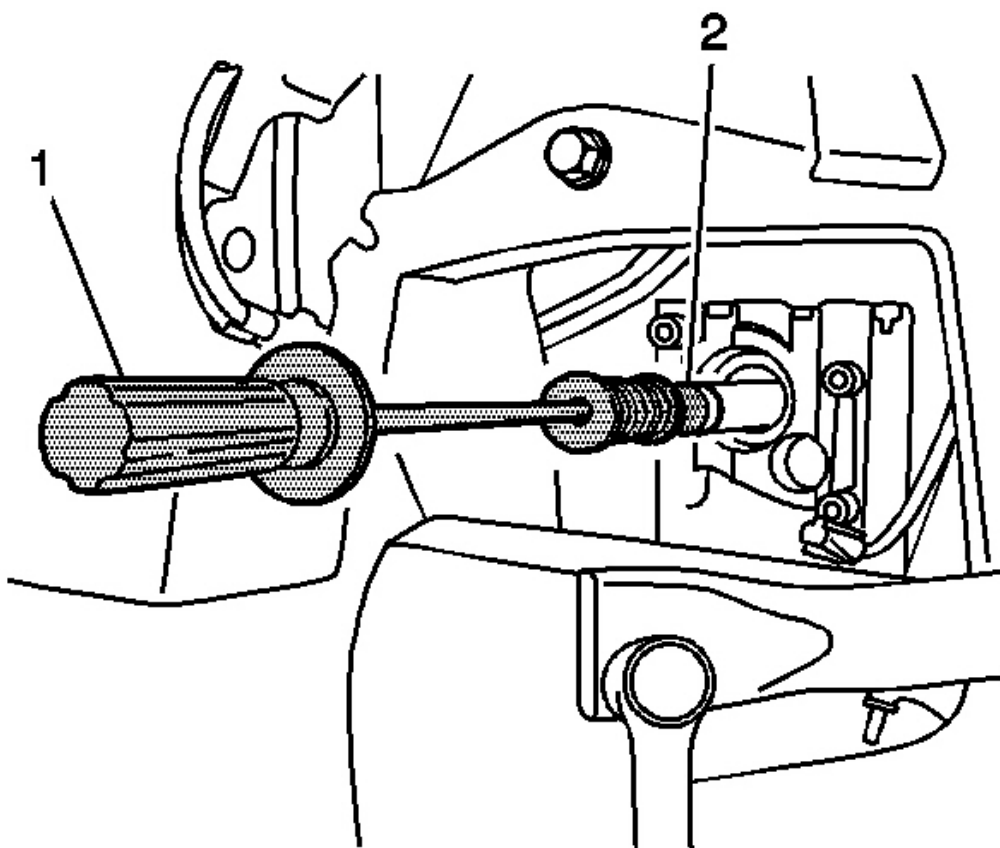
Identifying Slide Hammer & Axle Remover Adapter
